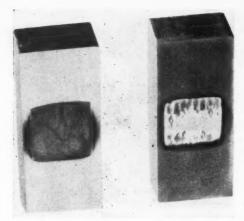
Samples of hardened tool steel burned badly by plunging wheel into work on a surface grinder. The piece on the left shows the original visible burn. A similar burn mark was ground out gently in the piece on the right, which was then etched to bring out the rehardened (white) area surrounded by a soft (dark) boundary. (actual size)
